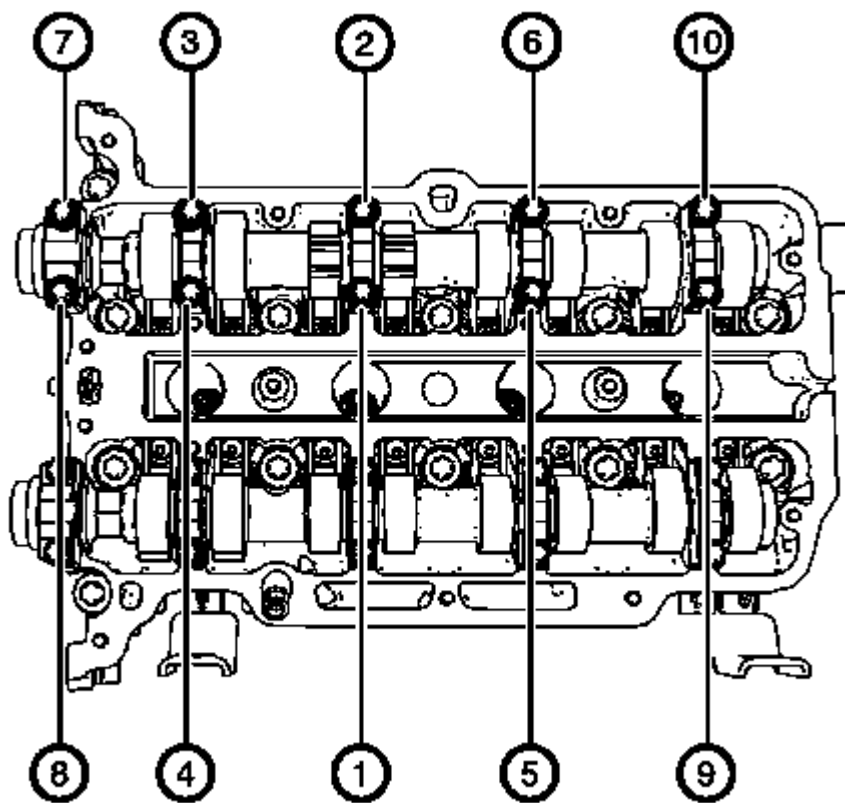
Intake Camshaft Bearing Cap Bolts Tightening Sequence
